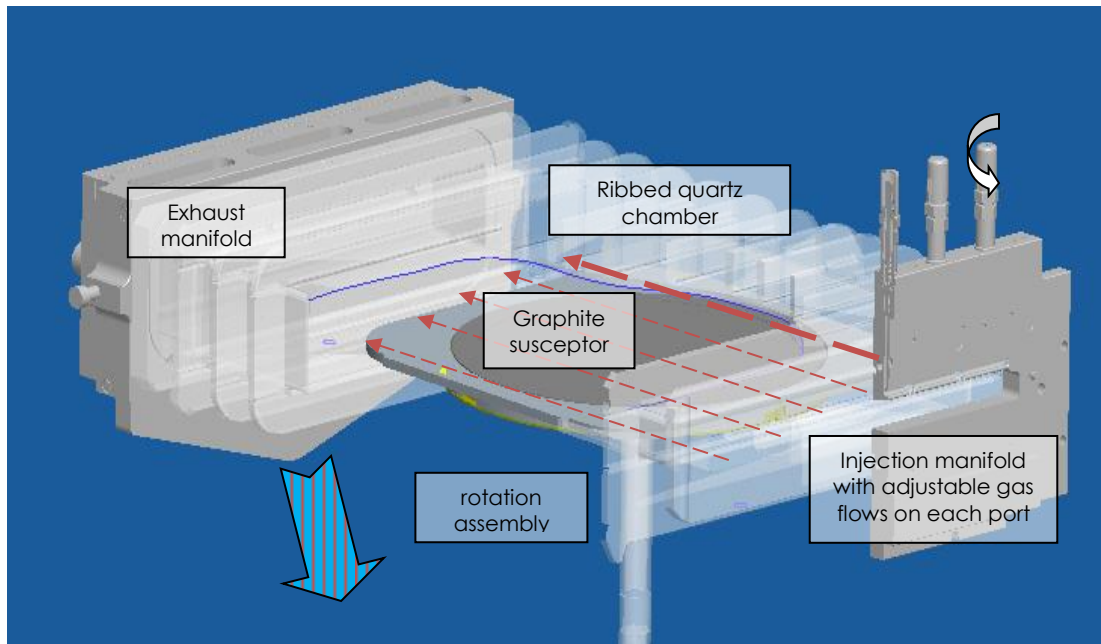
Cut-away drawing of the deposition chamber. The injection manifold (far-right) has five ports of which three are shown
